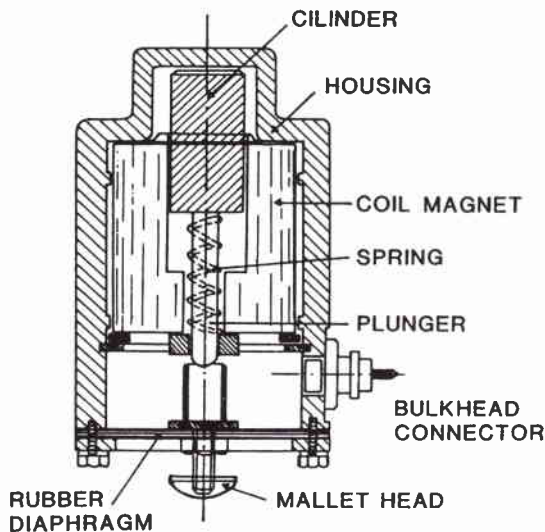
Cutaway view of electromechanical mallet for crosshole S wave measurements (Marelli type 6360082 solenoid).
